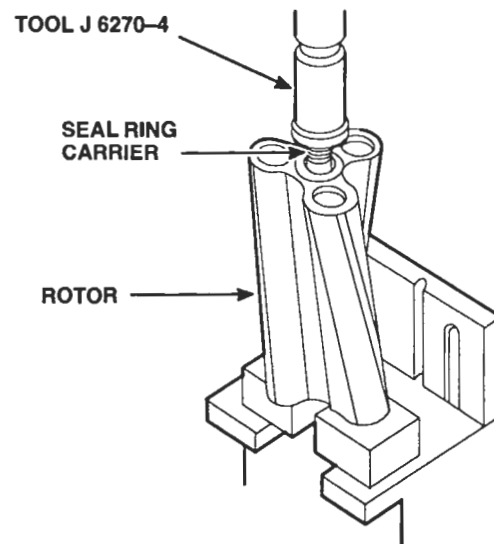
Installing Oil Seal Ring Carrier on Blower Rotor Shaft
